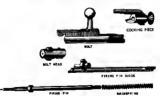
BOLT ASSEMBLY COMPONENTS.
